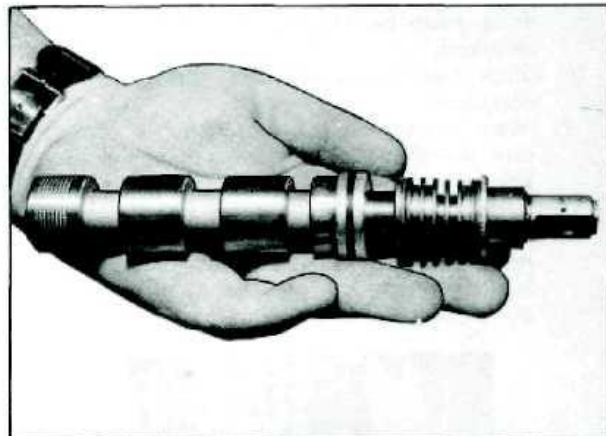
Power Pack Spool (Note outer bush assembly).
